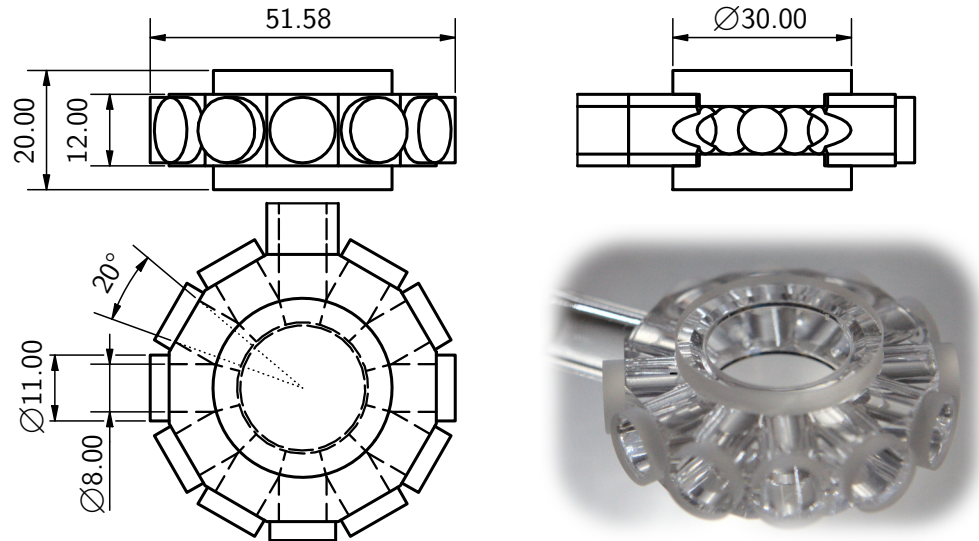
Technical drawing and photograph of the installed twelve-sided glass cell with relevant dimensions (all dimensions given in millimetres). The top and bottom viewports used for high resolution imaging are recessed into the main body by 2 mm.
